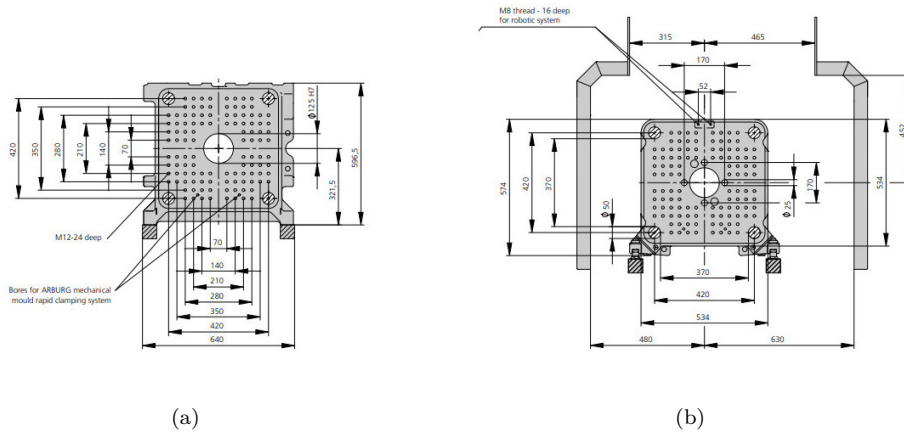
Fixed (a) and moving (b) mold mounting platen.
